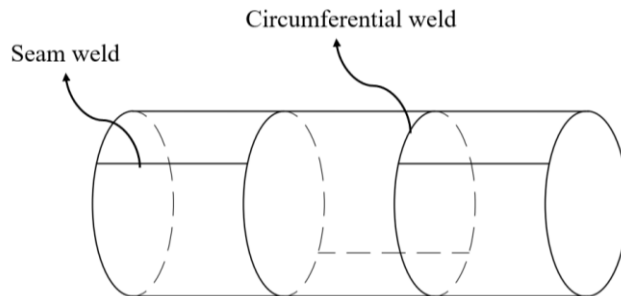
Schematic showing typical weld patterns for a can-welded tube section.
